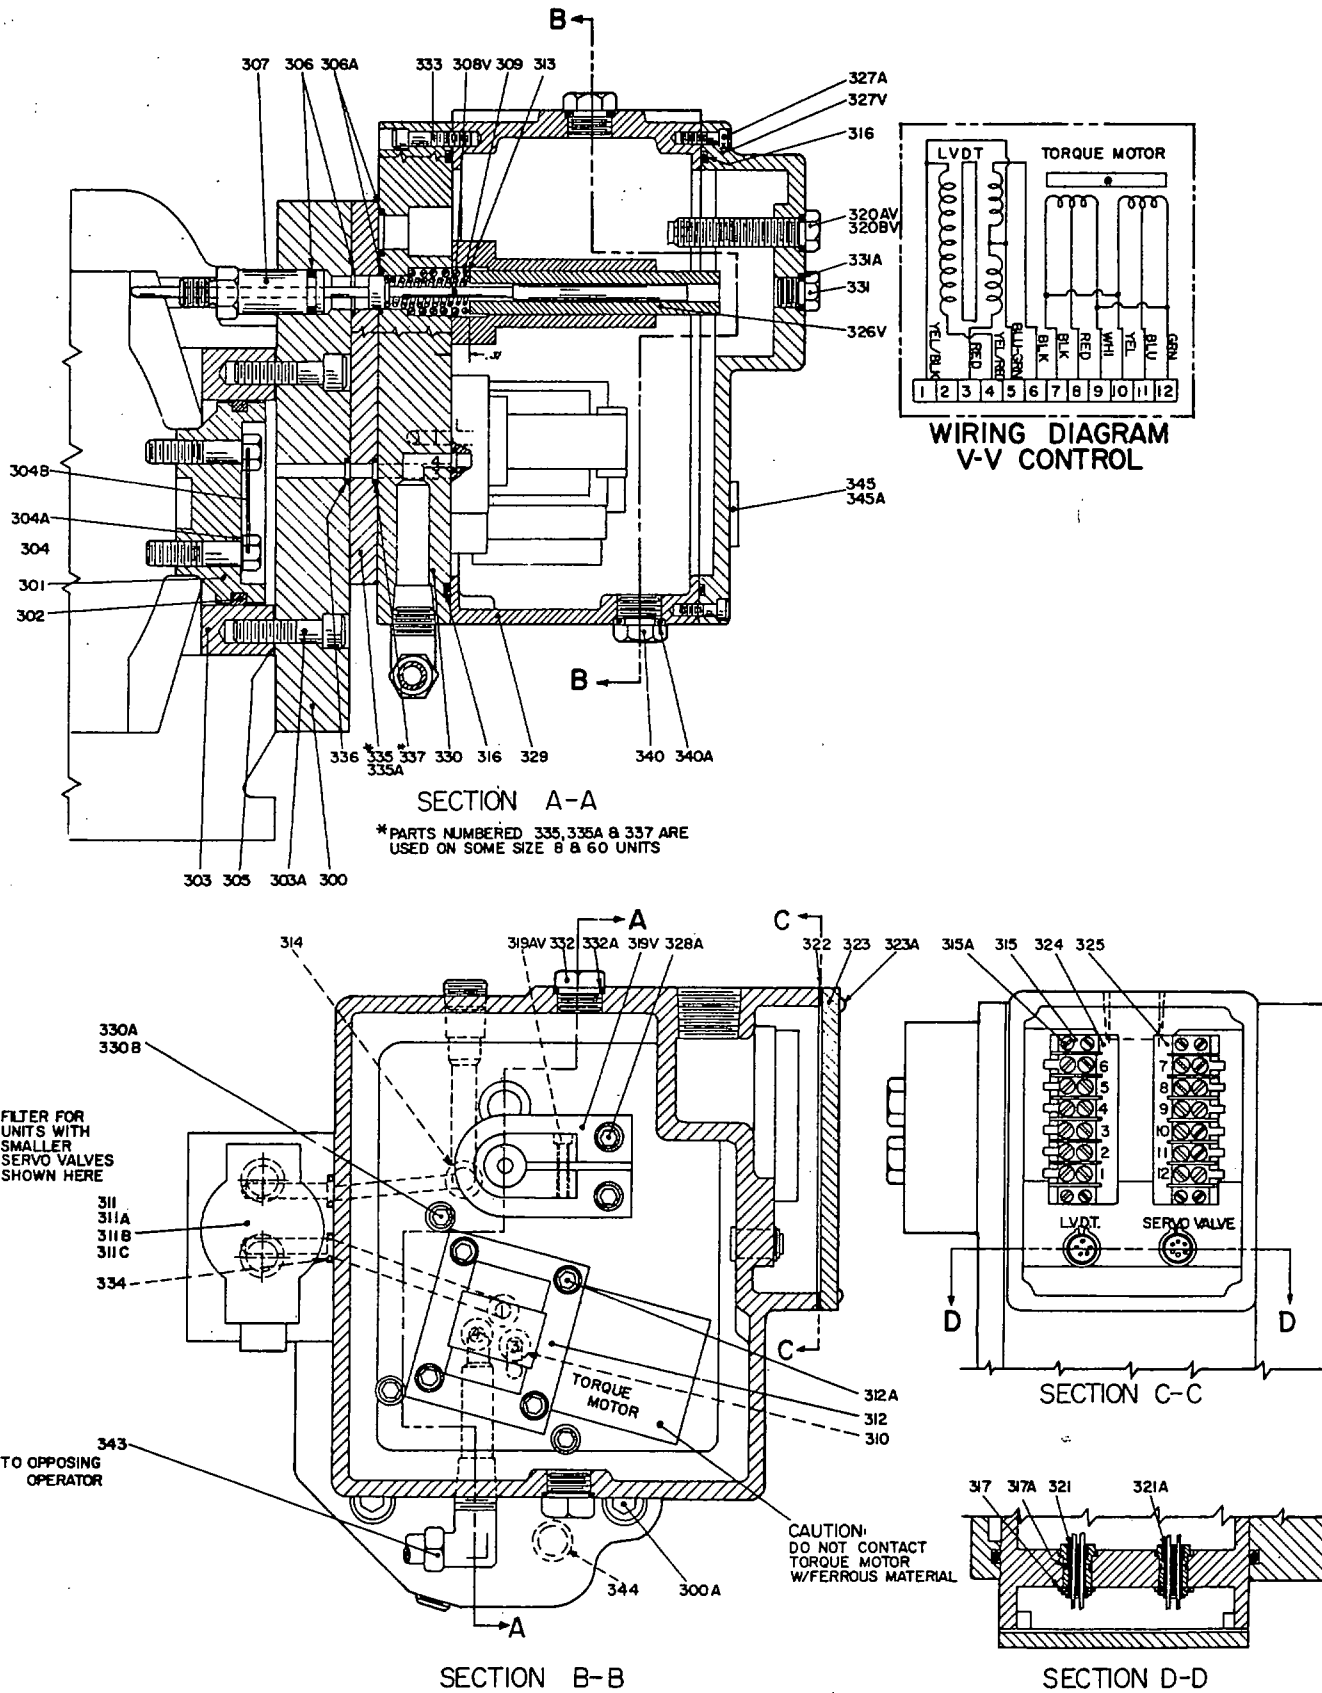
Parts Drawing, Type "V-V" and "V-N" Control, sheet 1 of 2, DS-947743D (501776D)
